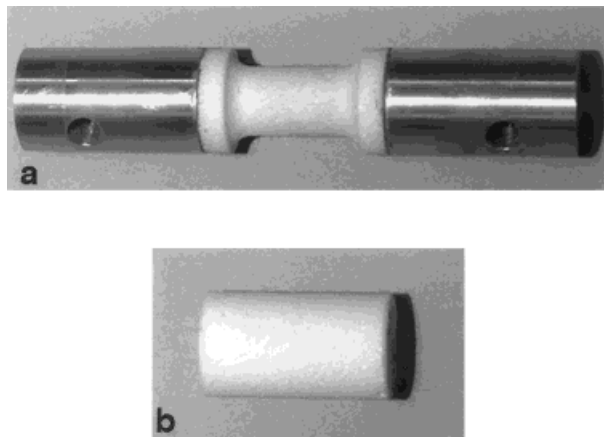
Specimen geometries used in this study: (a) tension specimen had a 25.4-mm gauge length with a 19.0-mm reduced gauge diameter. Steel pull studs were bonded to the specimen ends for mounting in the test frame. (b) Compression specimens were simple, free-standing right cylinders 50.8-mm long and 28.7 mm in diameter.
